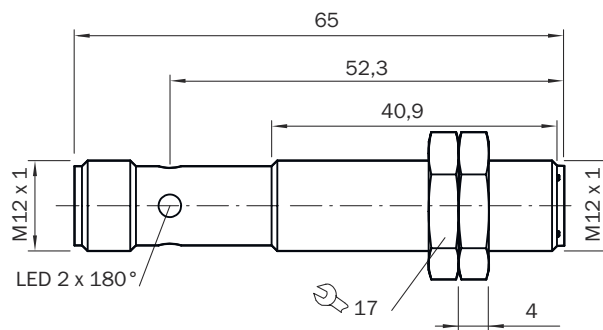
Dimensional drawing IME2S12-\*\*B\*\*C0
